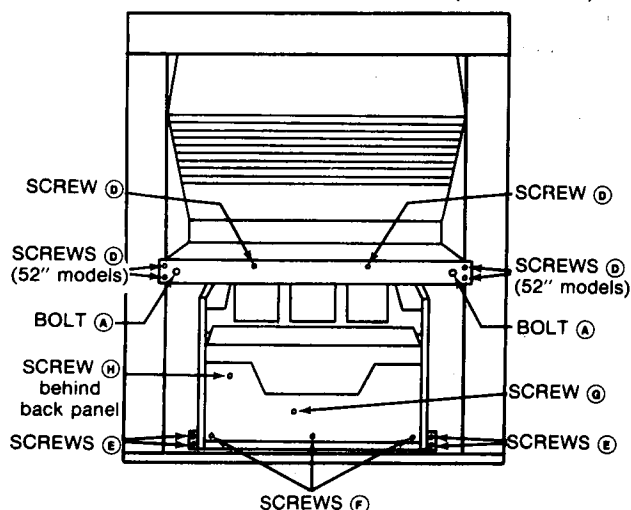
Cabinet Rear View (Backcover Removed) Mod-els: 46GW950, P46100/150, P52150
